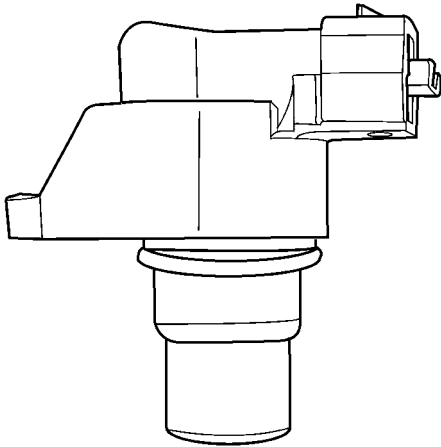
CAMSHAFT POSITION SENSOR - 3.7L
